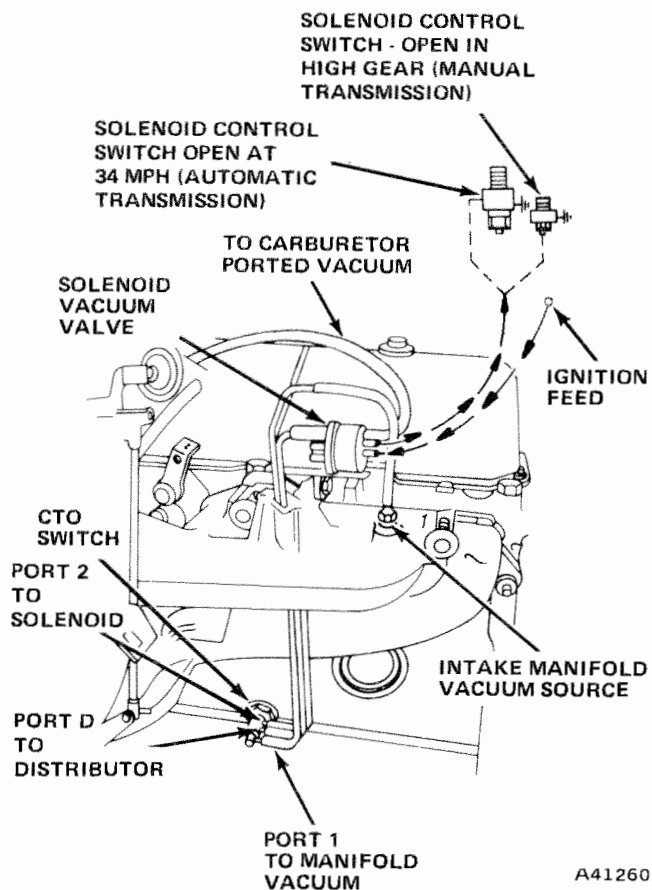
A-33 Typical TCS System - Six-Cylinder Shown
